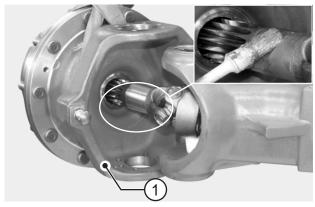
Lubricate the terminal of the u-joint and install the steering case (1).
